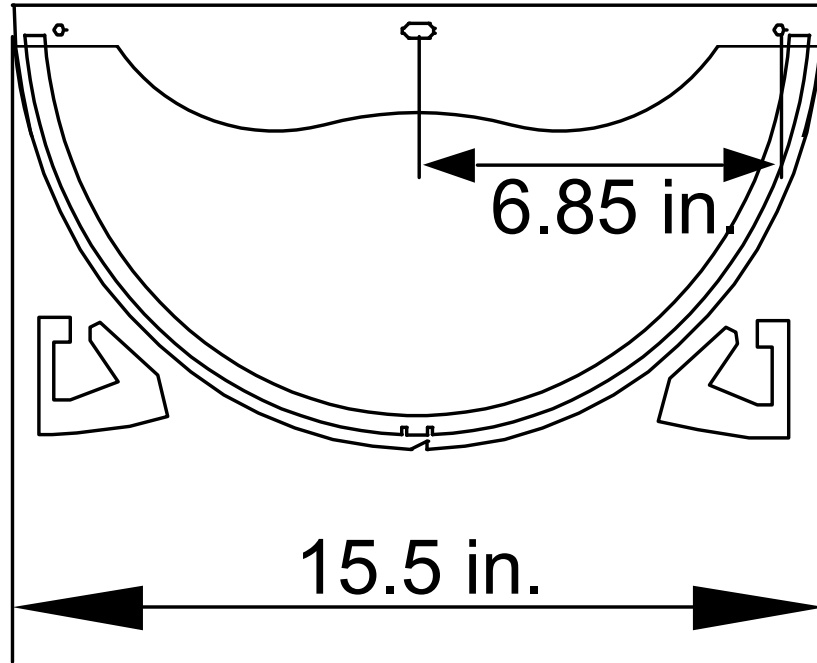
PAPR cover assembly drawing. Produced by an Autodesk student version.
